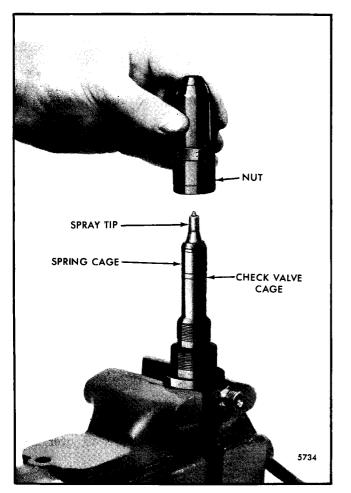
Assembling Injector Valve Parts on Tip Tester Adaptor J 23010-129
